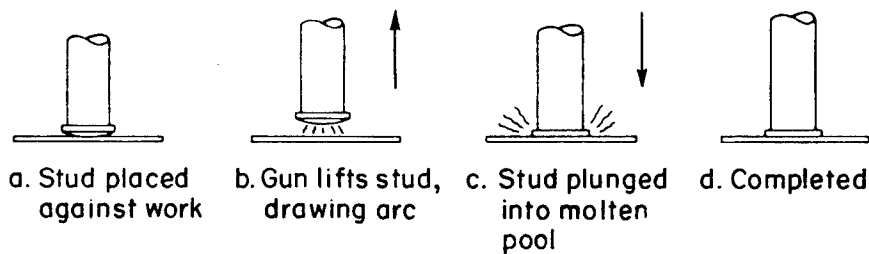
SCHEMATIC DIAGRAM ILLUSTRATING STEPS IN DRAWN-ARC CAPACITOR DISCHARGE STUD WELDING
